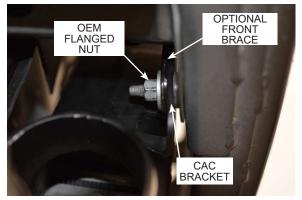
c: CAC Installation - Vehicles w/ Front Braces
